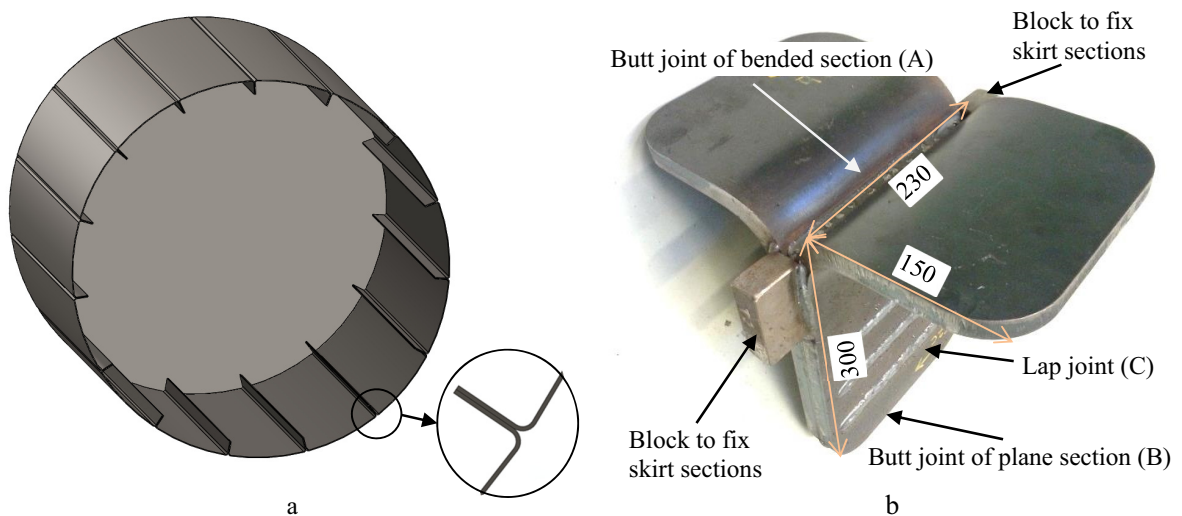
(a) Several skirt sections are bended and joined to form a bucket skirt. The joint between two skirt sections is magnified. (b) Skirt section, made of 16 mm thick plates with a bending radius of 40 mm, used for the experiments with the different welding possibilities.
